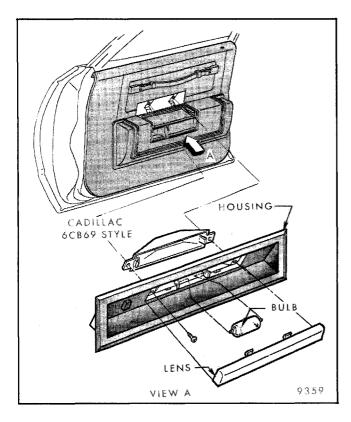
Reading Lamp Removal and Installation - Cadillac 6CB69 Style
